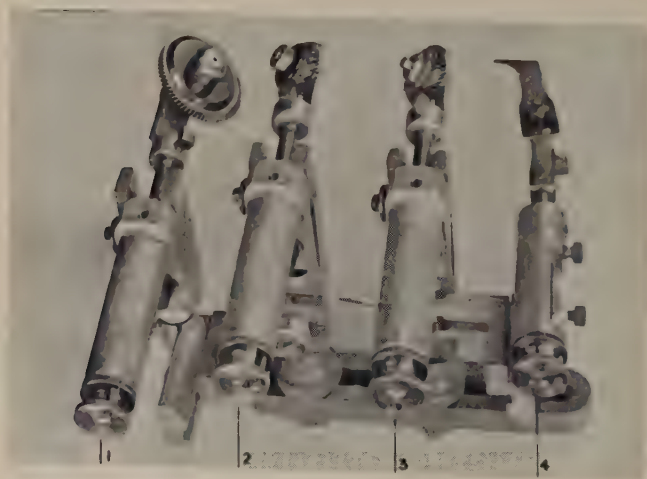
Arrangement for terry cloth: (1) clearing bur; (2) terry bur; (3) sinker bur; (4) plain presser.
